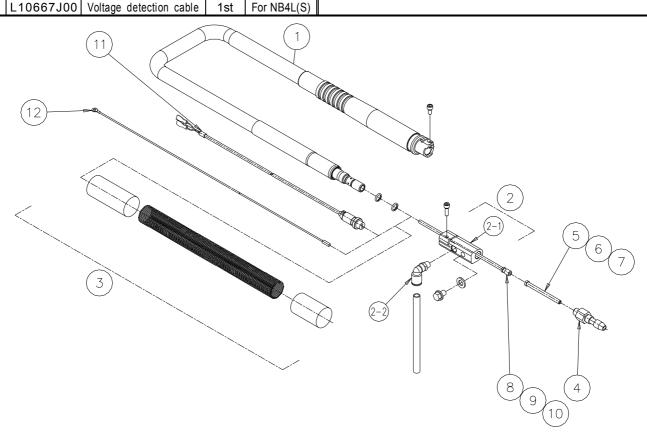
Exploded diagram for the coaxial power cable (For B4 type manipulator [DL power supply, M350L or P500L])
